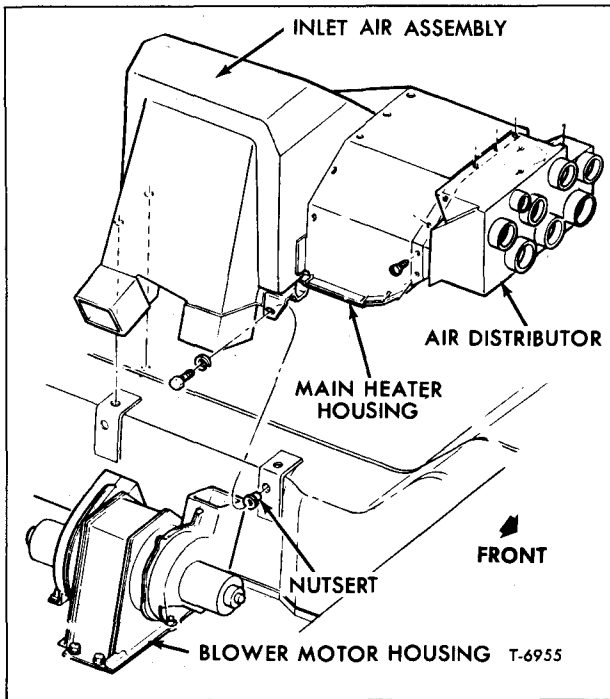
Blower Motor Assembly, Main Heater Housing, and Air Distributor Assembly
